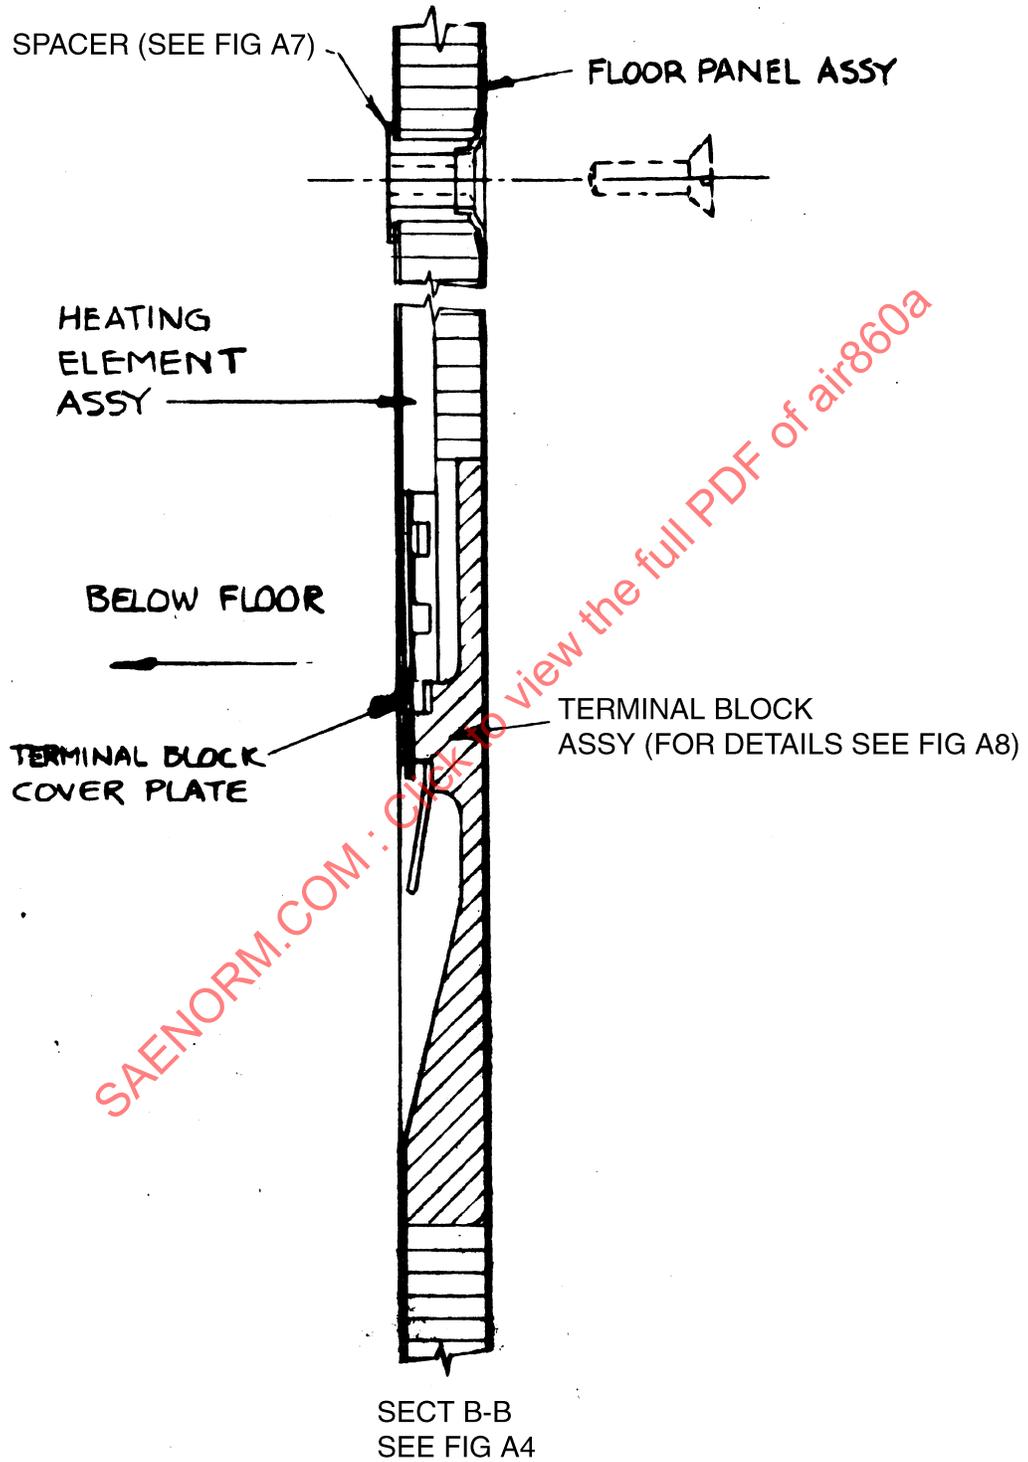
Section - Terminal Block - Floor Panel Installation
